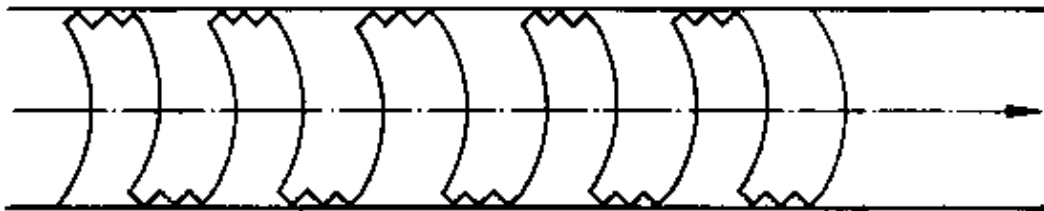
Motions of the electrode for electrodes with thick coating for welding inner passes and cover passes
